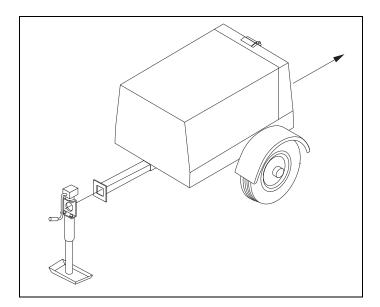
The draw bar with jack assembly on the rear of the trailer
